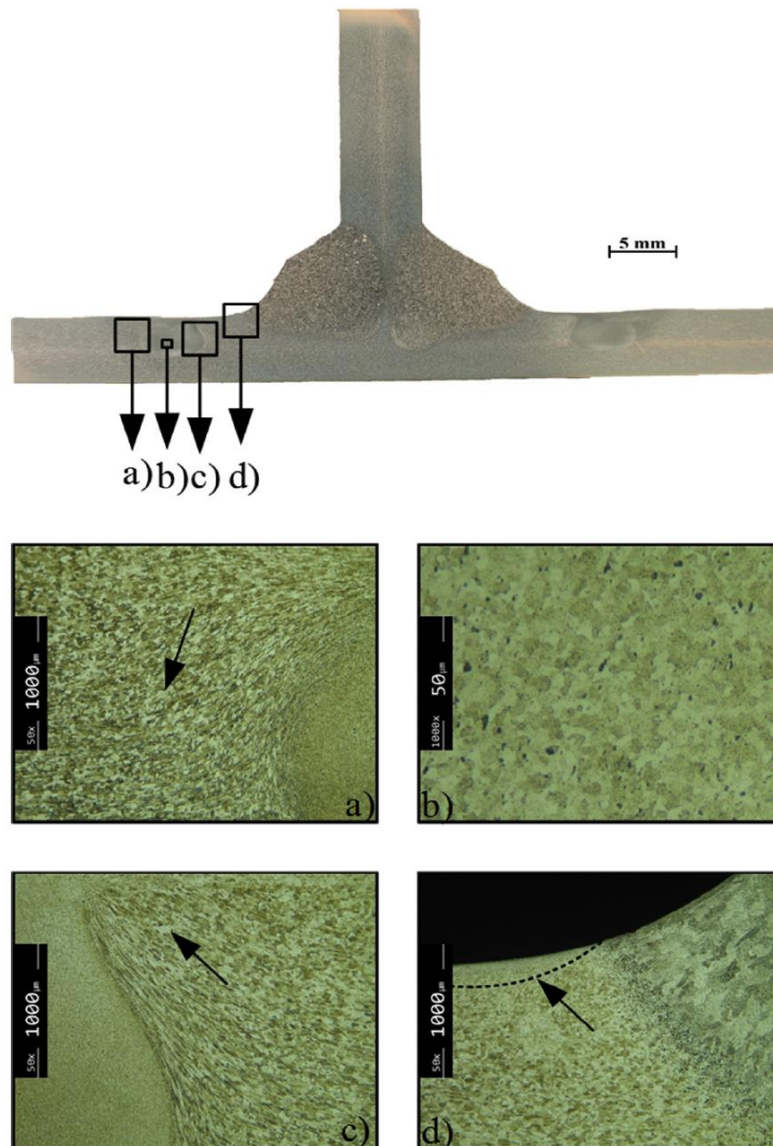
Metallographic analysis of an FSP GMAW weld: (a) retreating side, (b) nugget zone, (c) advancing side, (d) toe of a post-processed weld.
